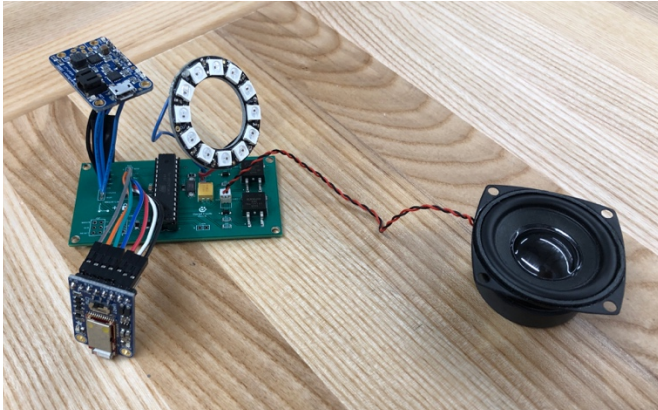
The PCB assembled with the battery charger IC, BLE module, LED ring, speaker, and all SMD components in place
